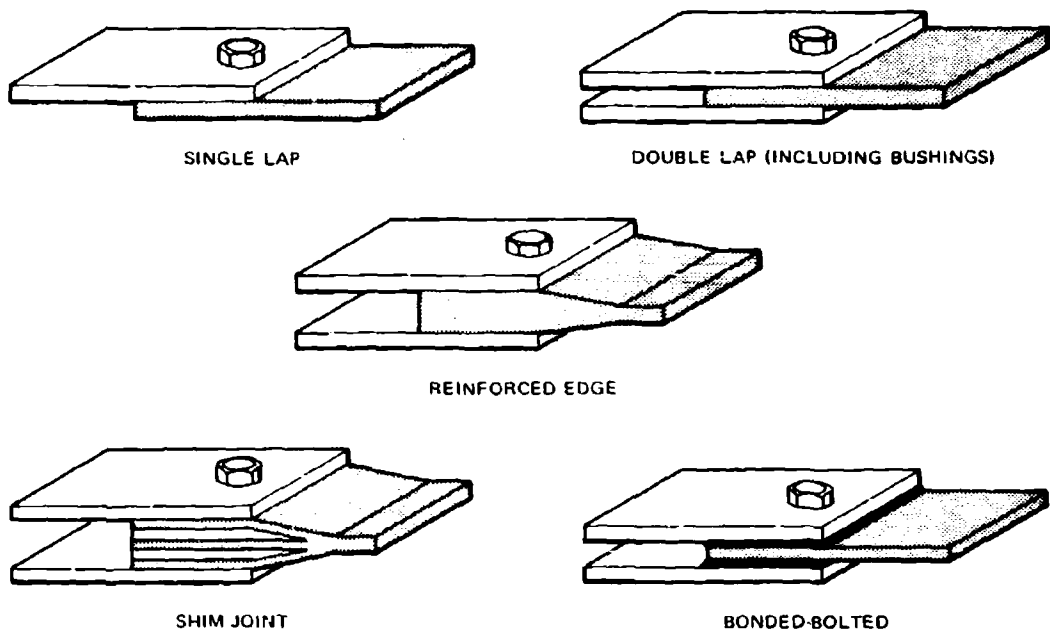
BOLTED JOINT DESIGN CONCEPTS
